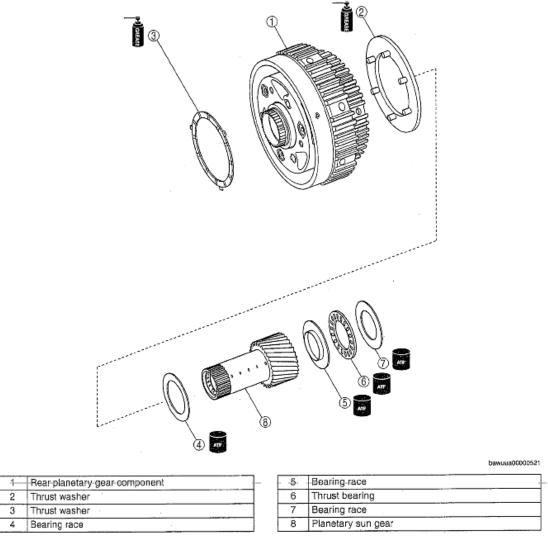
Identifying Rear Planetary Gear Component And One-Way Clutch Component Assembly Courtesy of MAZDA MOTORS CORP.
